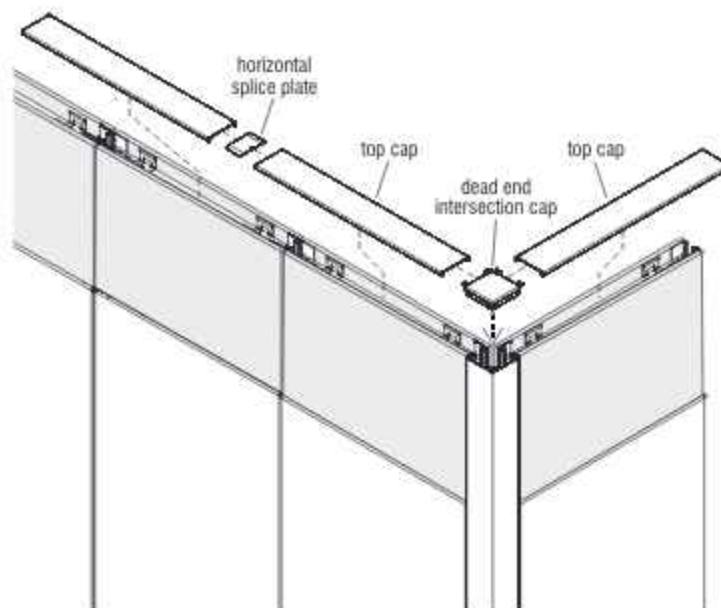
Stacking Sections (steel frame) - Top Cap Installation
